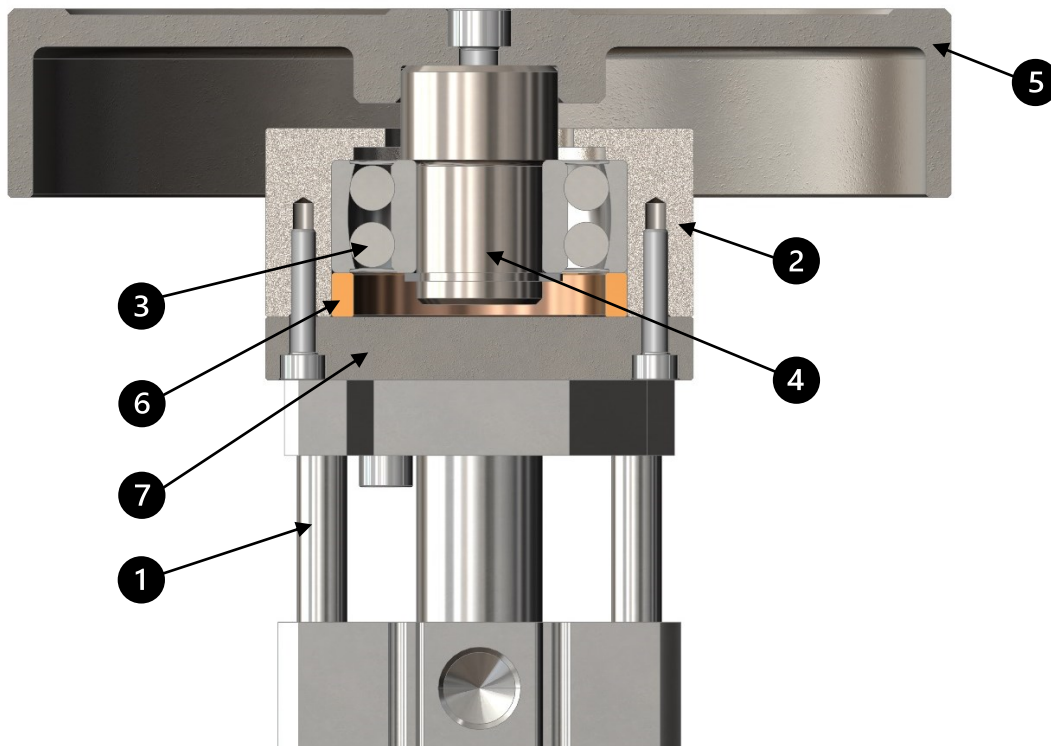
Fixture-compensator. (1) SMC CDQMA50TF-25 guide-rod cylinder. (2) Housing. (3) SKF 2204 E 2RS1TN9 self-aligning ball bearing. (4) Axle. (5) Fixture disc. (6) Hub. (7) Lid-Flange
